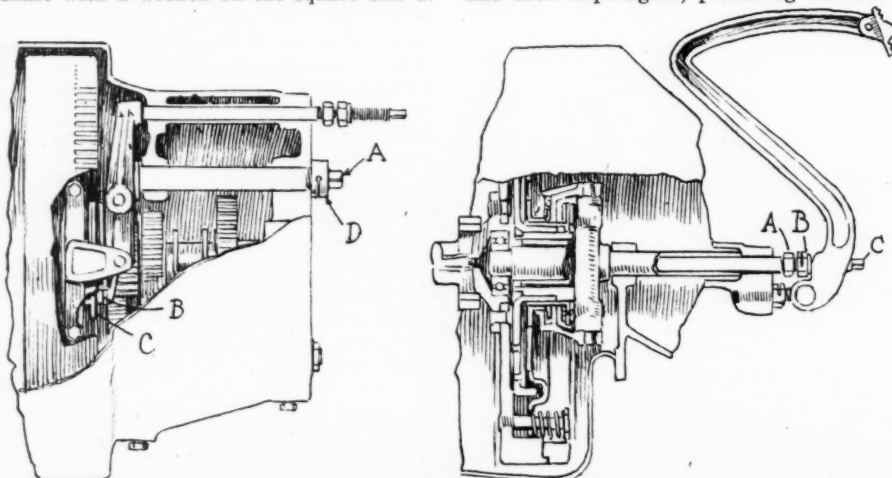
How to take up play in the clutch lever, left, and adjustments for clutch brake shaft, at right
